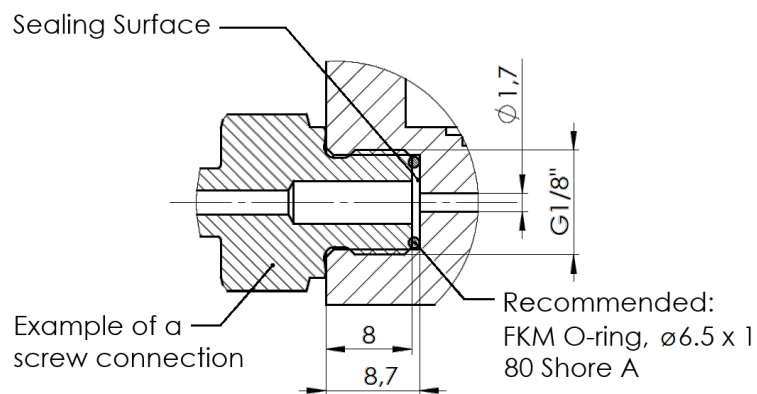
This is an example of a basic O-ring seal screw connection for the FTC180-OEM.
